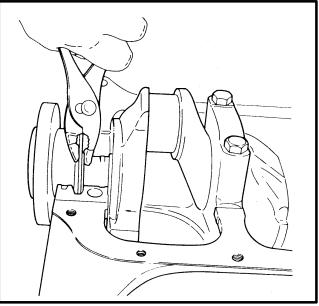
REAR MAIN BEARING REPLACEMENT
